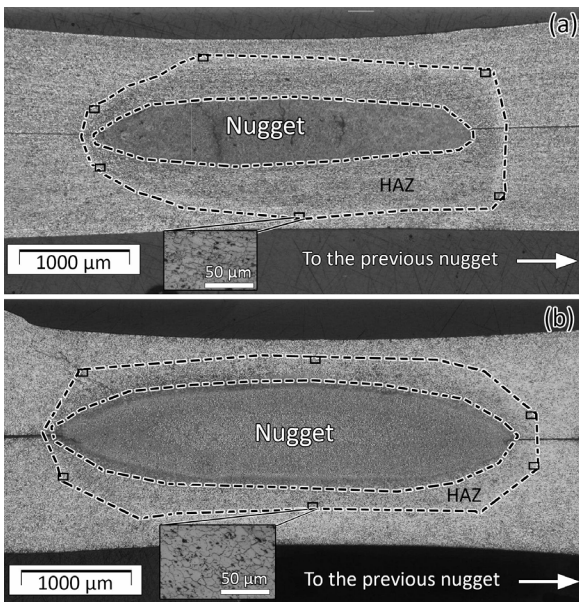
Section of welding nugget for a) 5 mm, b) 20 mm weld spacing, for 25.3 kA and 4 cycles welding current and time respectively; Rectangles indicate important places at which HAZ boundary is checked
